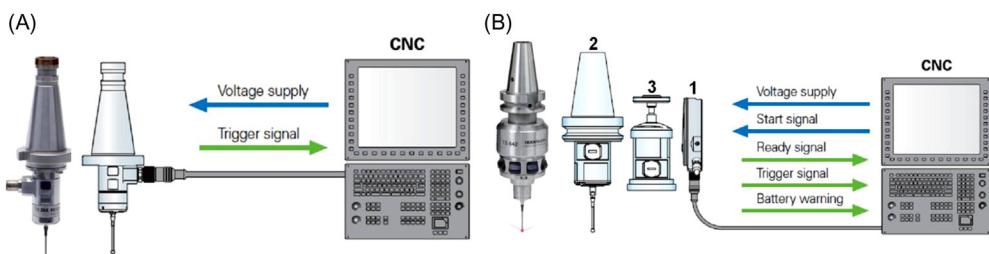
3D touch probes for machine tools [25]: (A) Probe with cable (hard-wired) signal transmission. (B) Probe with wireless signal transmission: 1- transmitter/receiver unit, 2-workpiece touch probe, 3-tool touch probe. *From Heidenhain.
